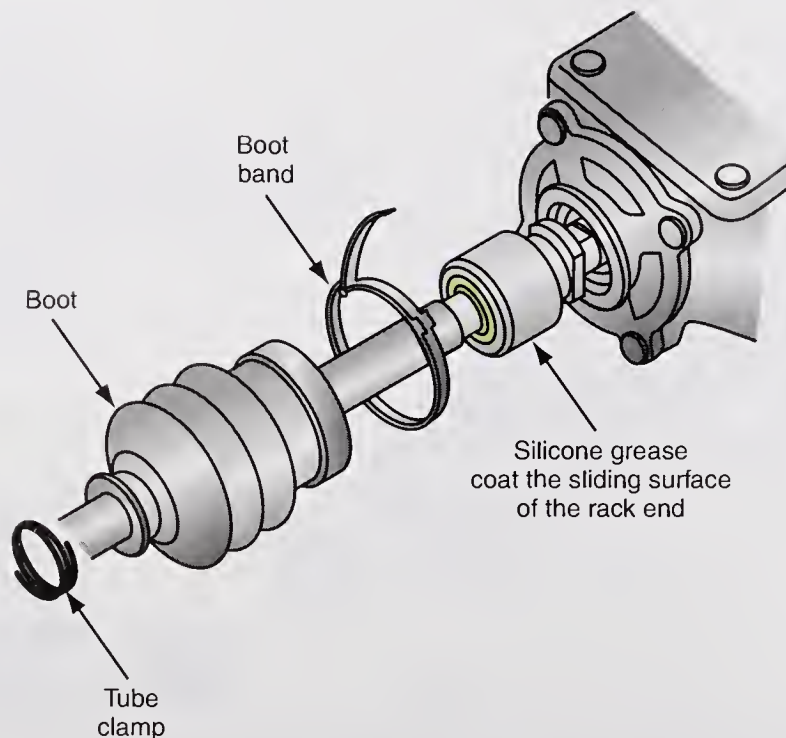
Lubricating of the inner tie-rod joint housing.
